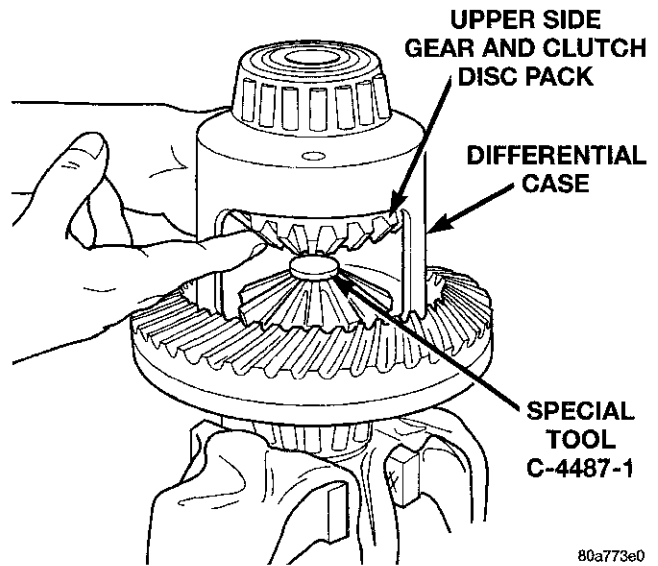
Upper Side Gear & Clutch Disc Pack Installation
